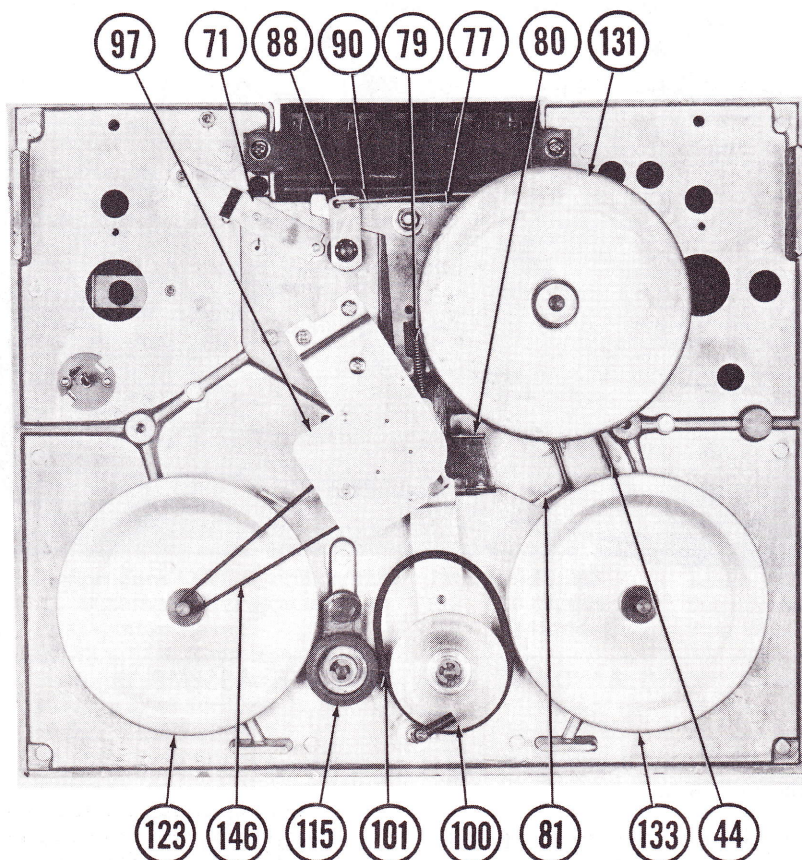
BOTTOM VIEW OF MECHANISM WITH DRIVE MOUNTING PLATE REMOVED
